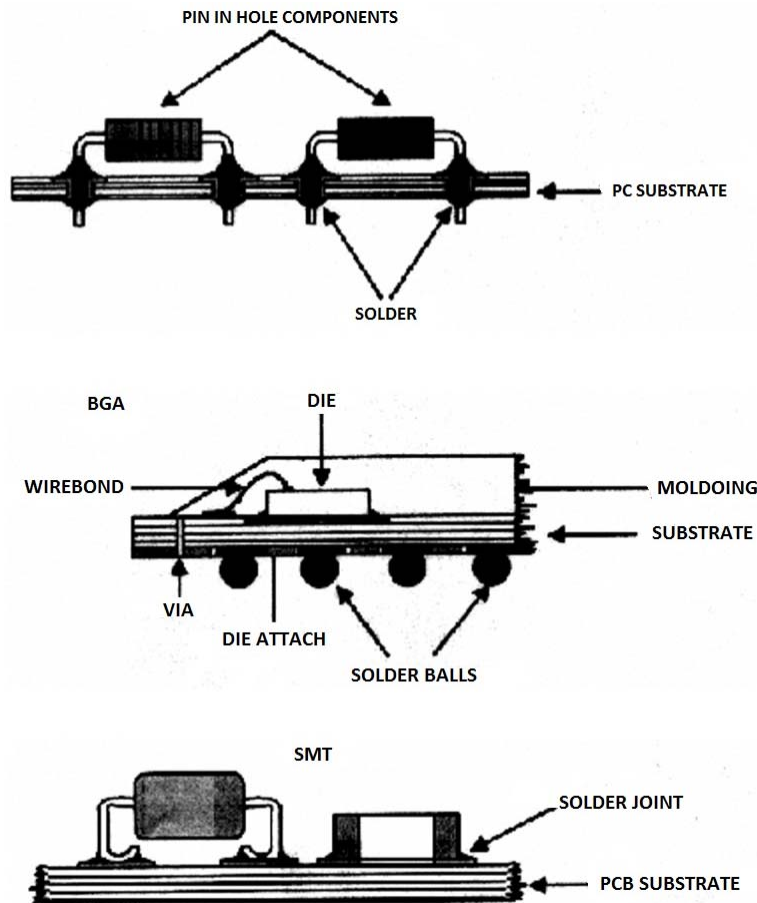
Schematic structures of PTH, SMT and BGA packages using solder interconnects.
